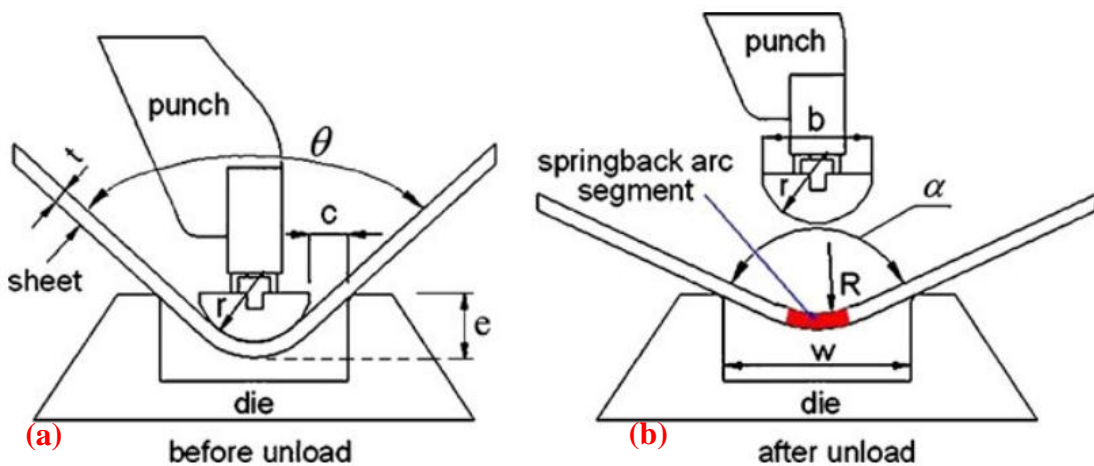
Geometrical model of air bending of sheet metal [7]
